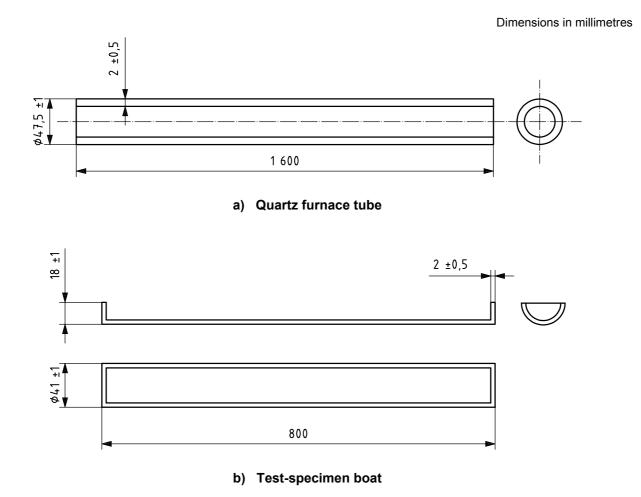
Dimensions of a suitable quartz furnace tube and test-specimen boat
